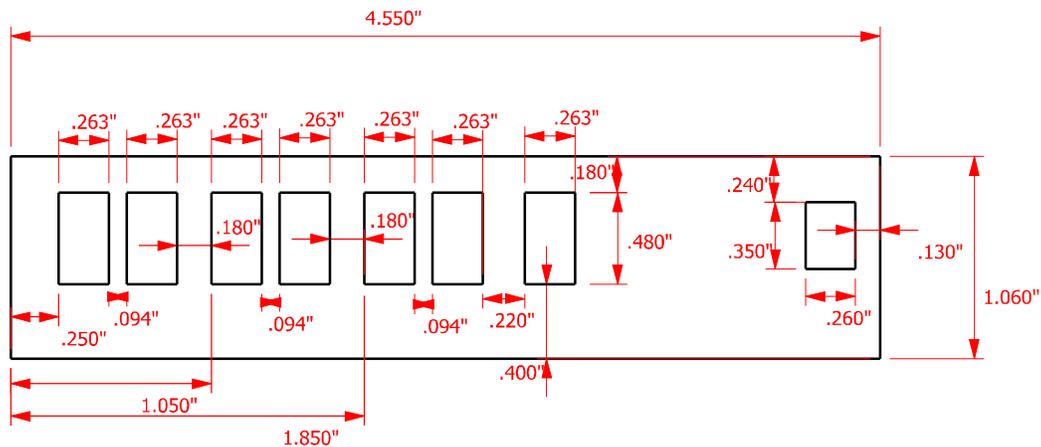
Drovers Caboose side view - dimensions from dial caliper measurements of MP 1112 car expressed in 3 decimal places
